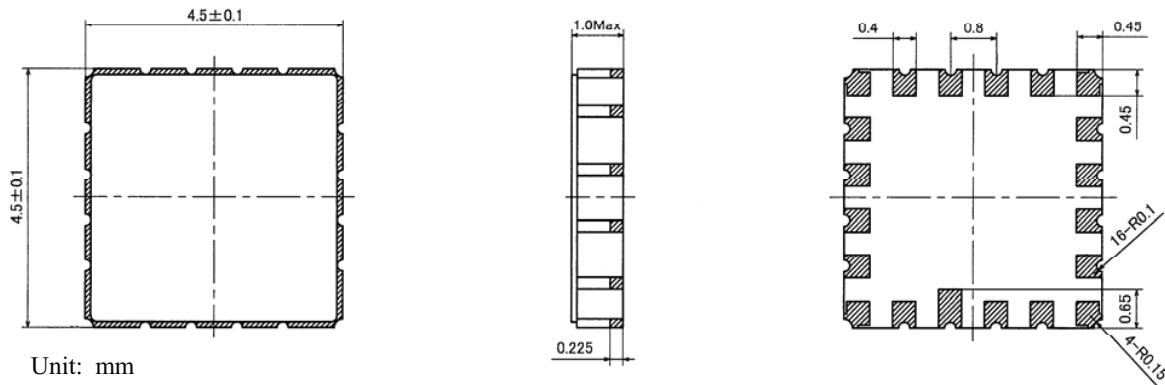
Outline dimensions of 6-axis sensor AK8976A.
